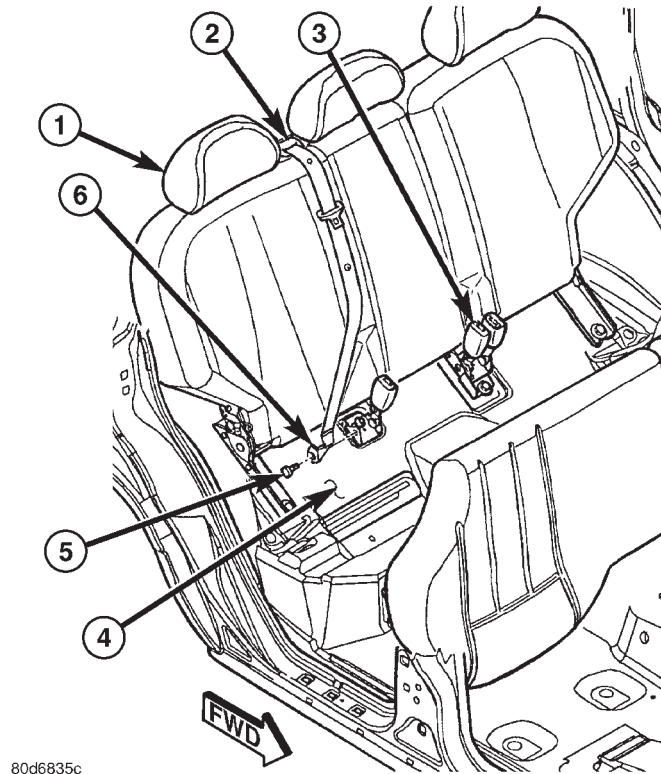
Rear Center Seat Belt Lower Anchor Remove/Install
